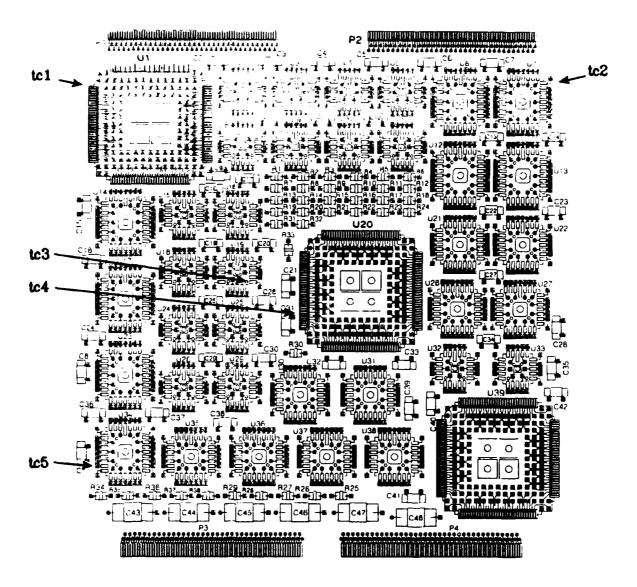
EMPI PWB Showing Thermocouple Bead Locations
